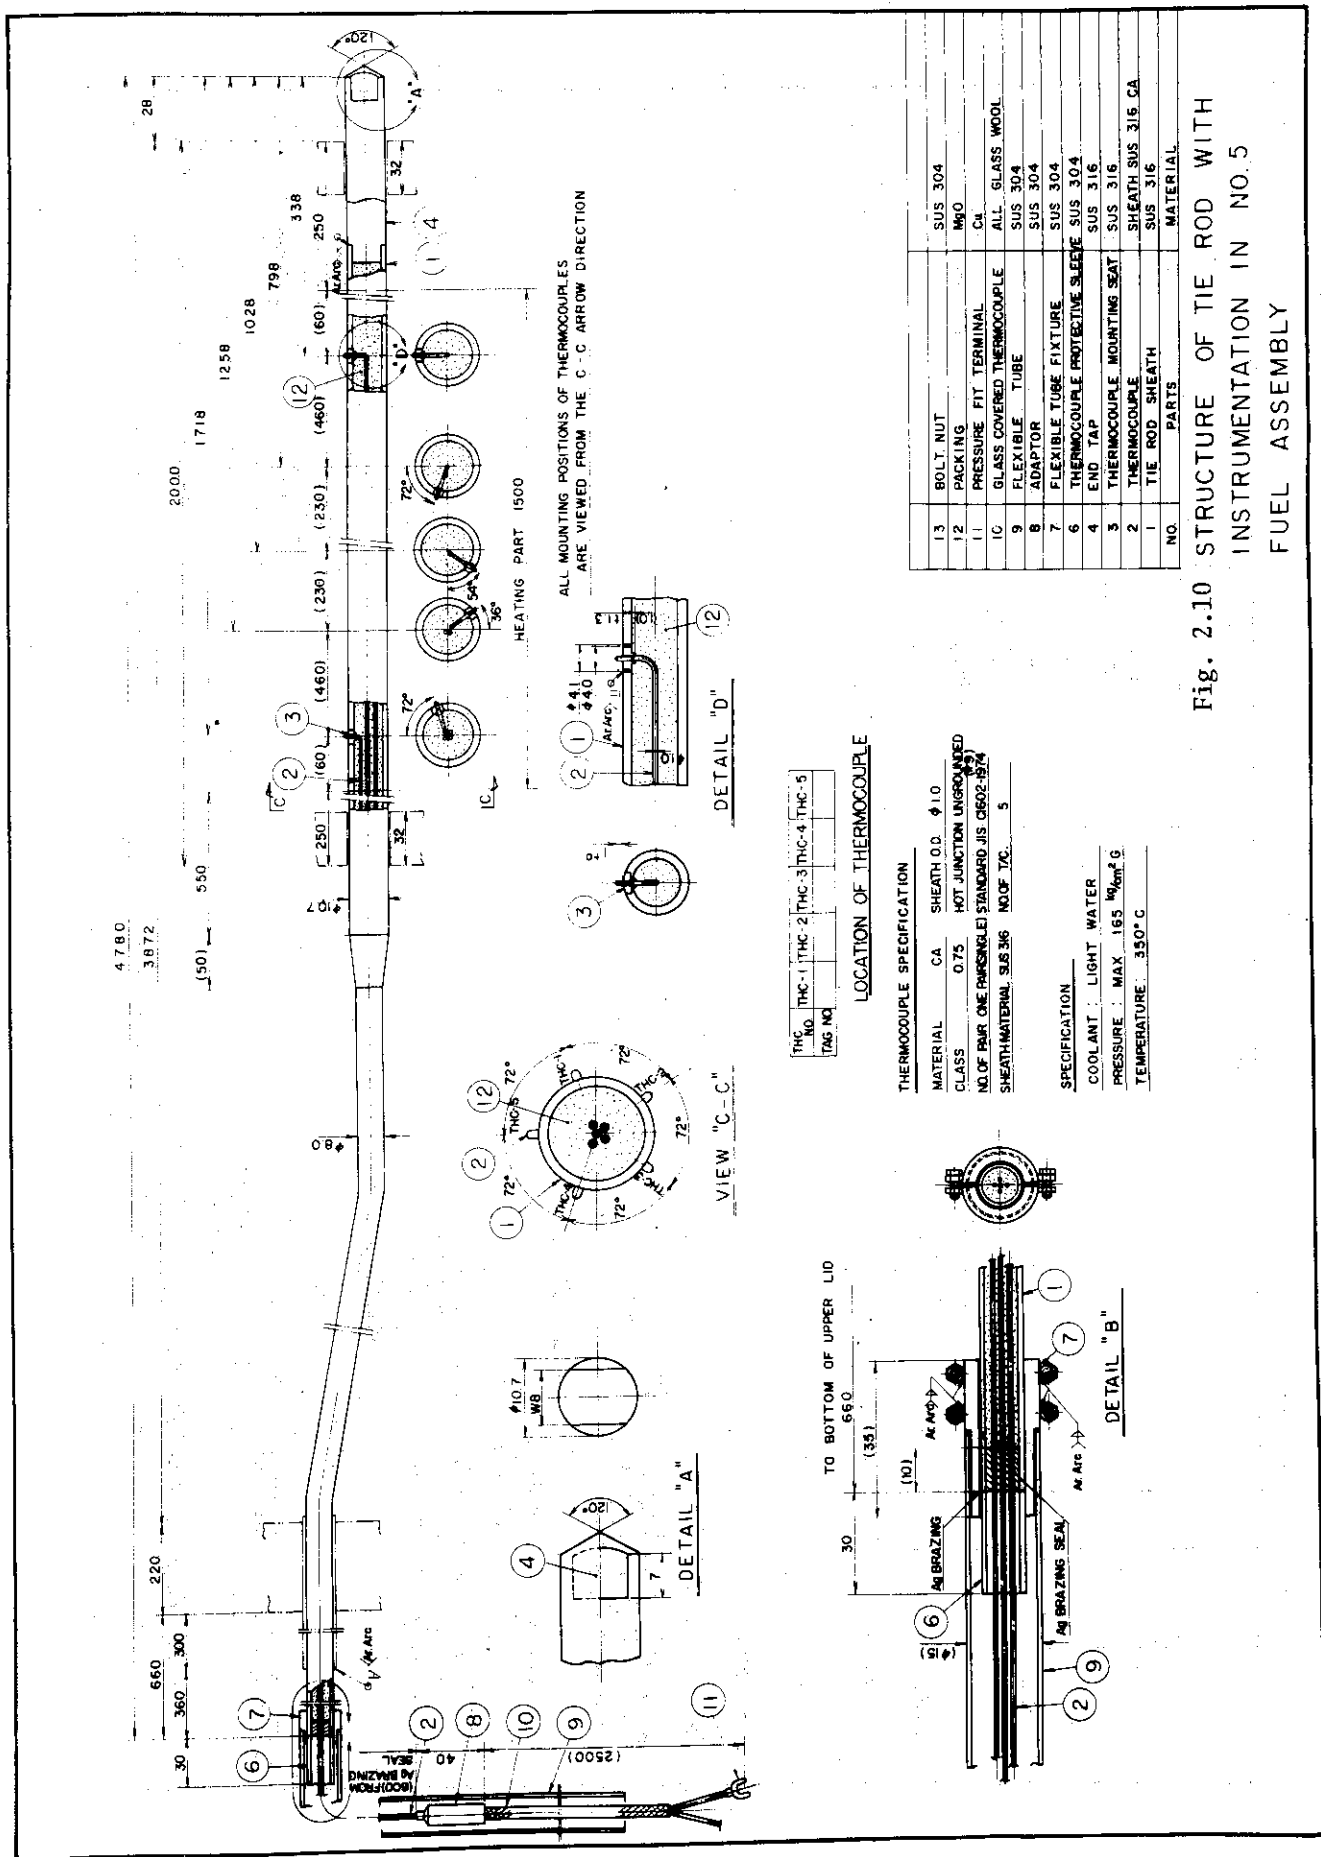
STRUCTURE OF THE ROD WITH INSTRUMENTATION IN NO.5 FUEL ASSEMBLY
